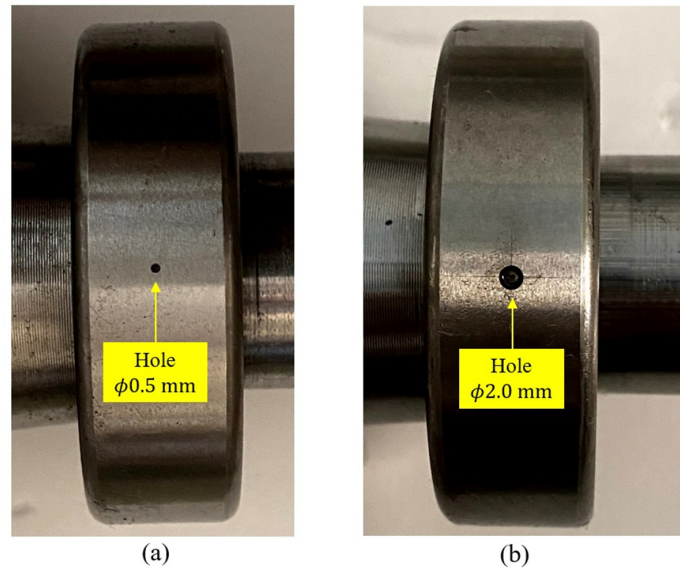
Bearing faults. (a) A hole of 0.5 mm, (b) a hole of 2.0 mm.
